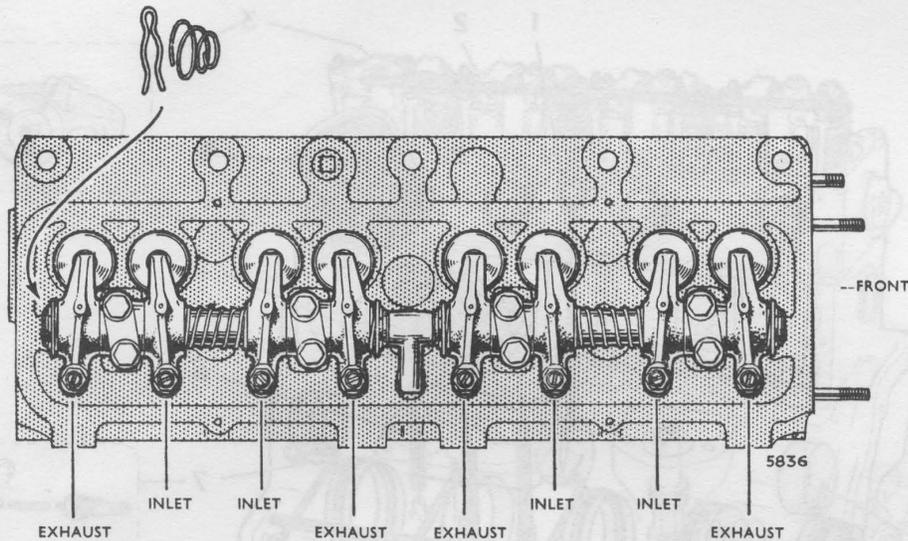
Valve rockers—engines with cast-iron cylinder heads.
